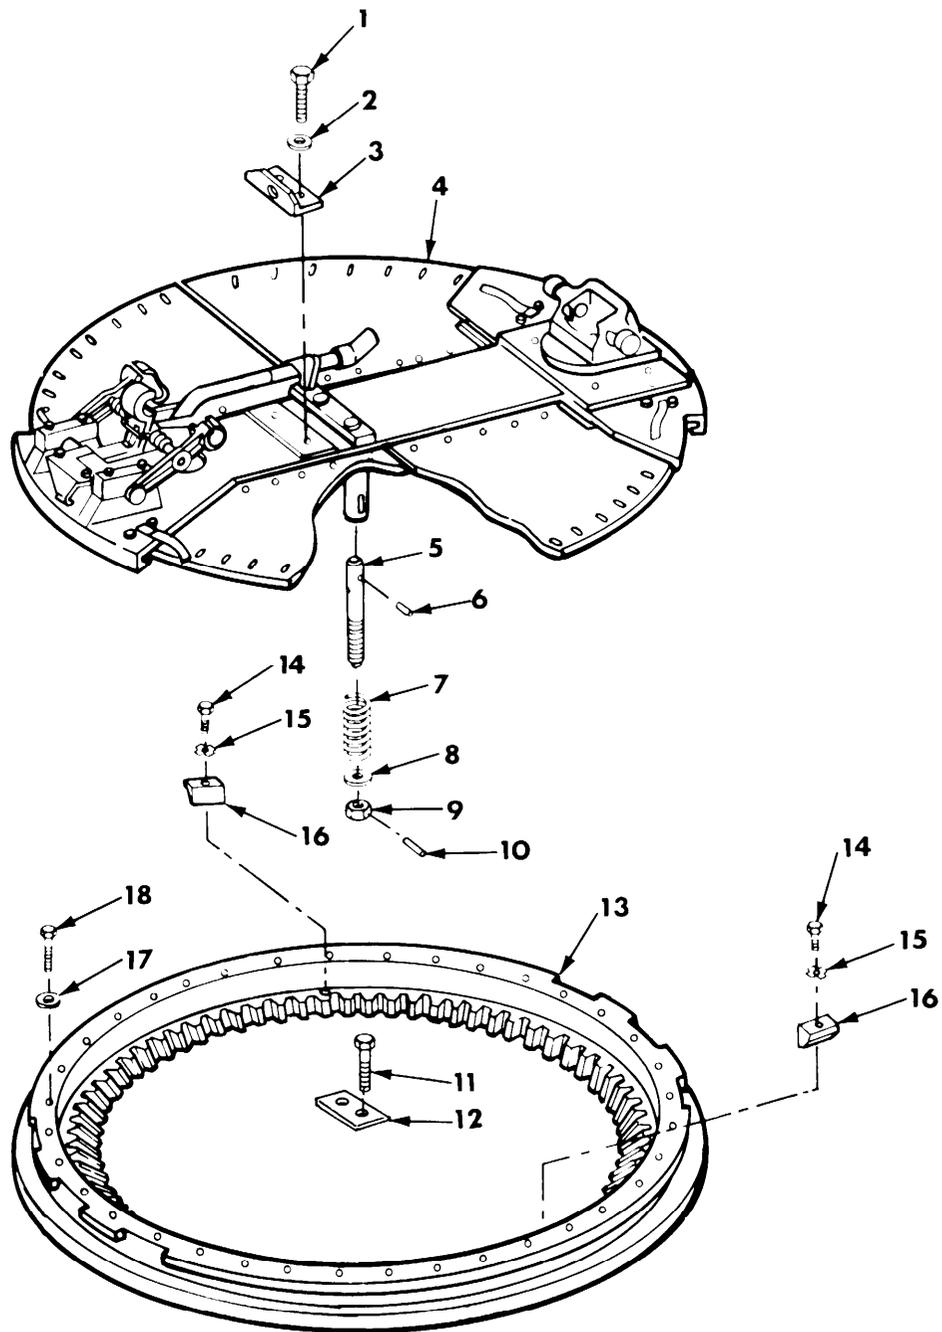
107-mm Mortar Turntable and Mount 10885903.
